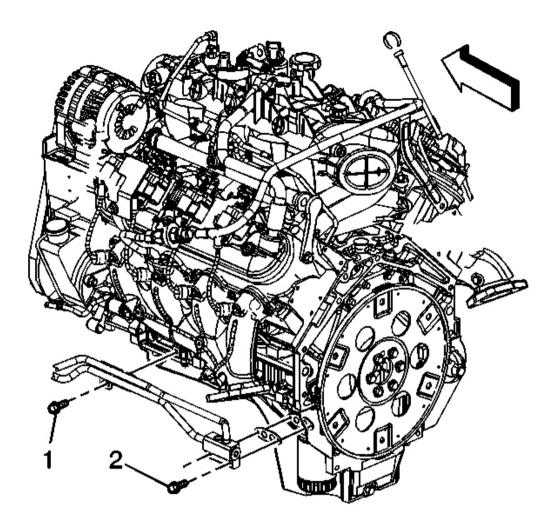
Oil Cooler Hose Bracket Bolt & Adapter Bolts Courtesy of GENERAL MOTORS CORP.
